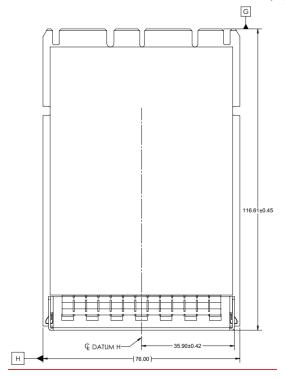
SFF OCP NIC 3.0 Card with Internal Lock CTF Dimensions (Front View)
